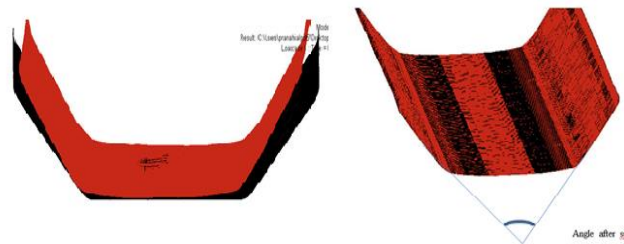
Formed blank included angle after spring-back is 85.3°
